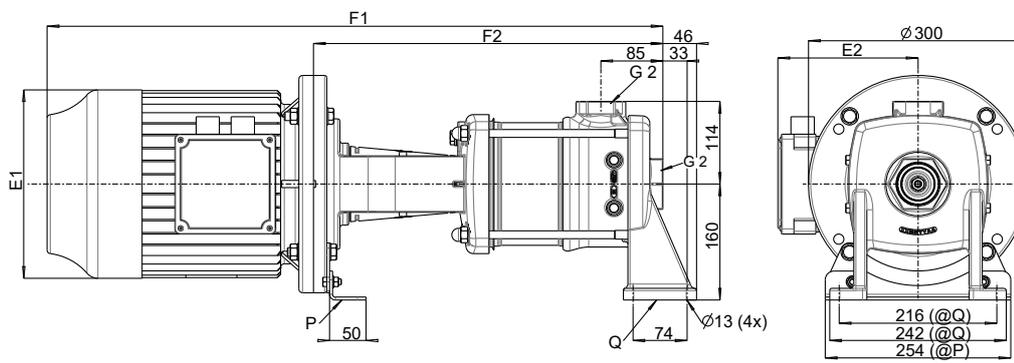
Dimensions and connections of DPH(S)I 15 with V1 motor
